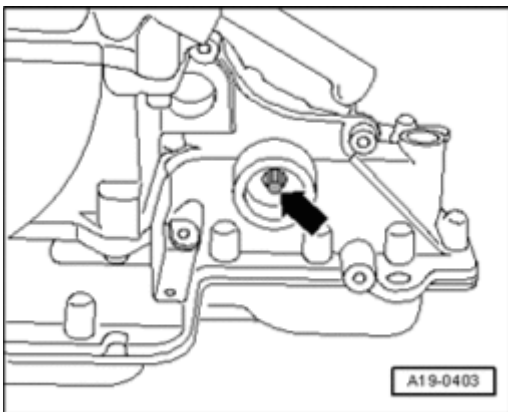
Removing/Installing Drive Shaft For Coolant Pump From Oil Pump
